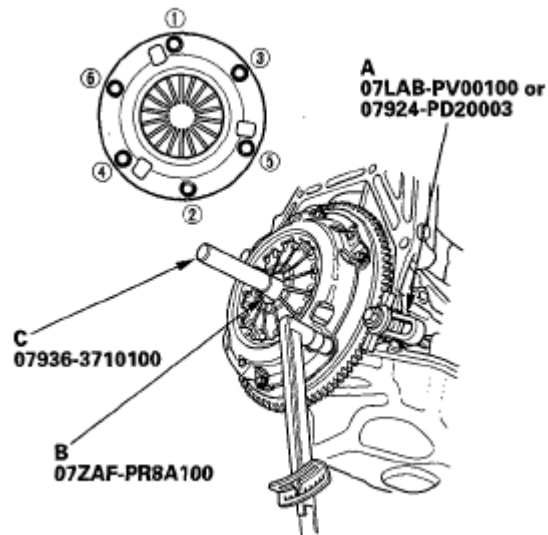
Tightening Mounting Bolts In Crisscross Pattern
